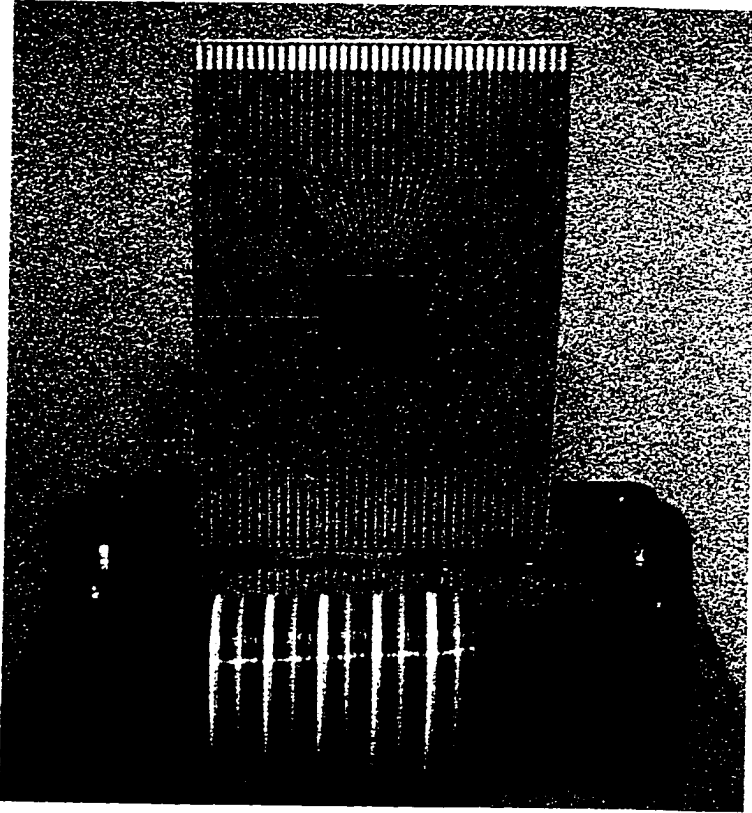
Chip-On-Board Specimen with Encapsulated Test Chip
